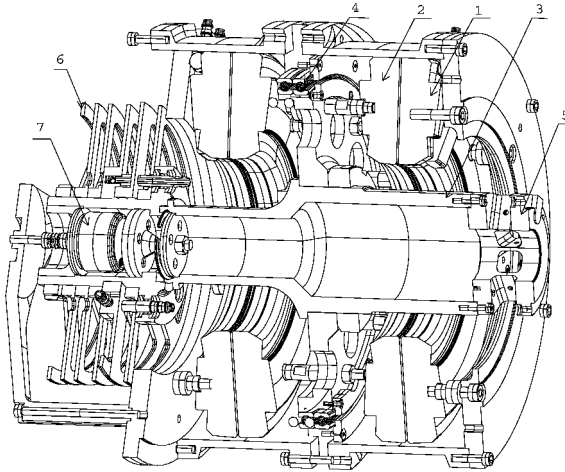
Cross section of the direct-drive motor. 1, Stator armature; 2, rotor armature; 3, hollow shaft; 4, bearing; 5, torque sensor; 6, wire and tube separator; 7, encoder.
